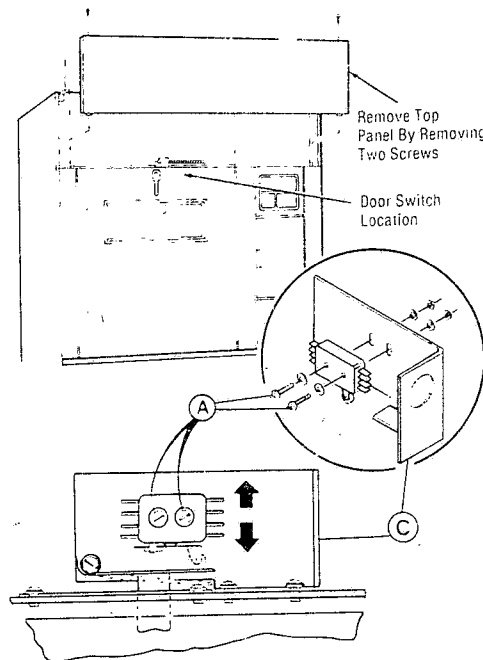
HINGED DOOR SWITCH ADJUSTMENT.
